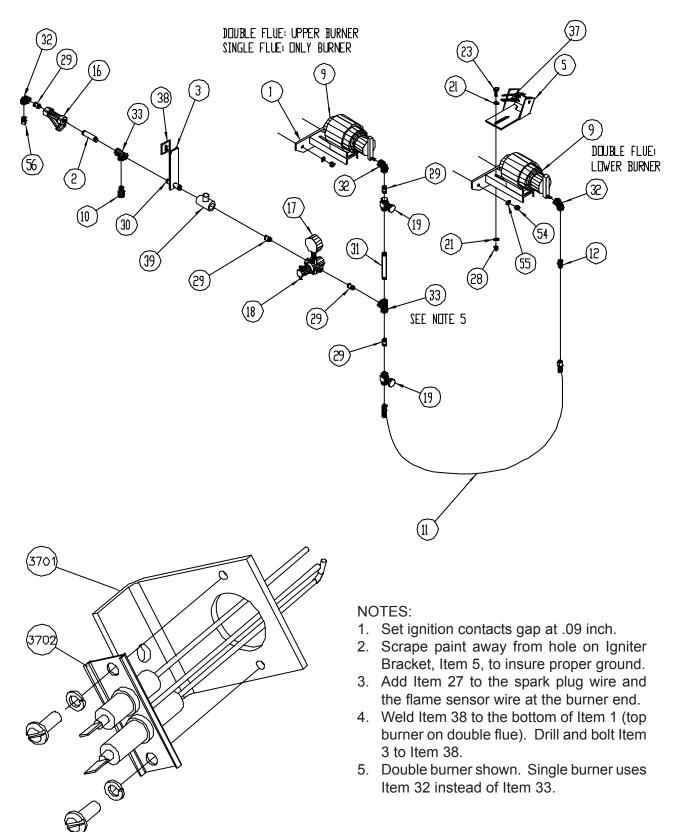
LPG BURNERS, DOUBLE FLUE, AUTO IGNITION (SHEET 1 OF 3)
